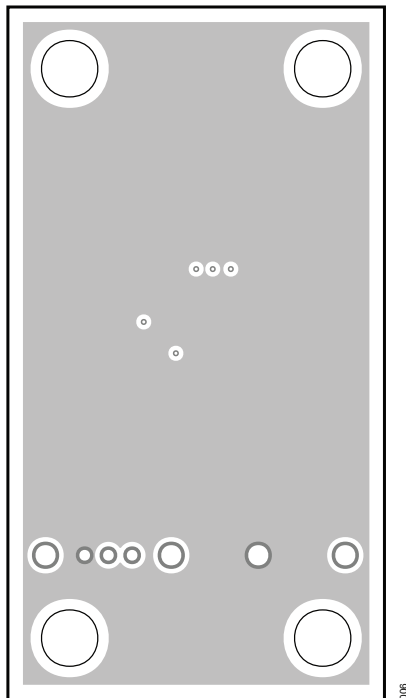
EVAL-ADPL21610-AZ PCB Layout—Internal 2
